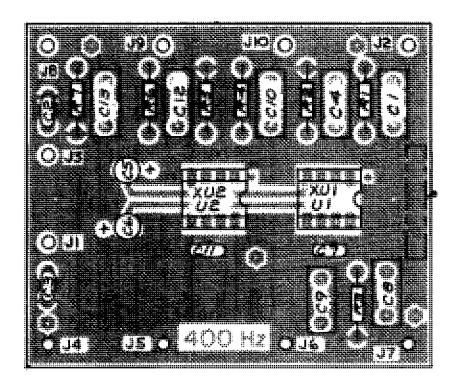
400 Hz Board A1A30 Parts Location Diagram.
